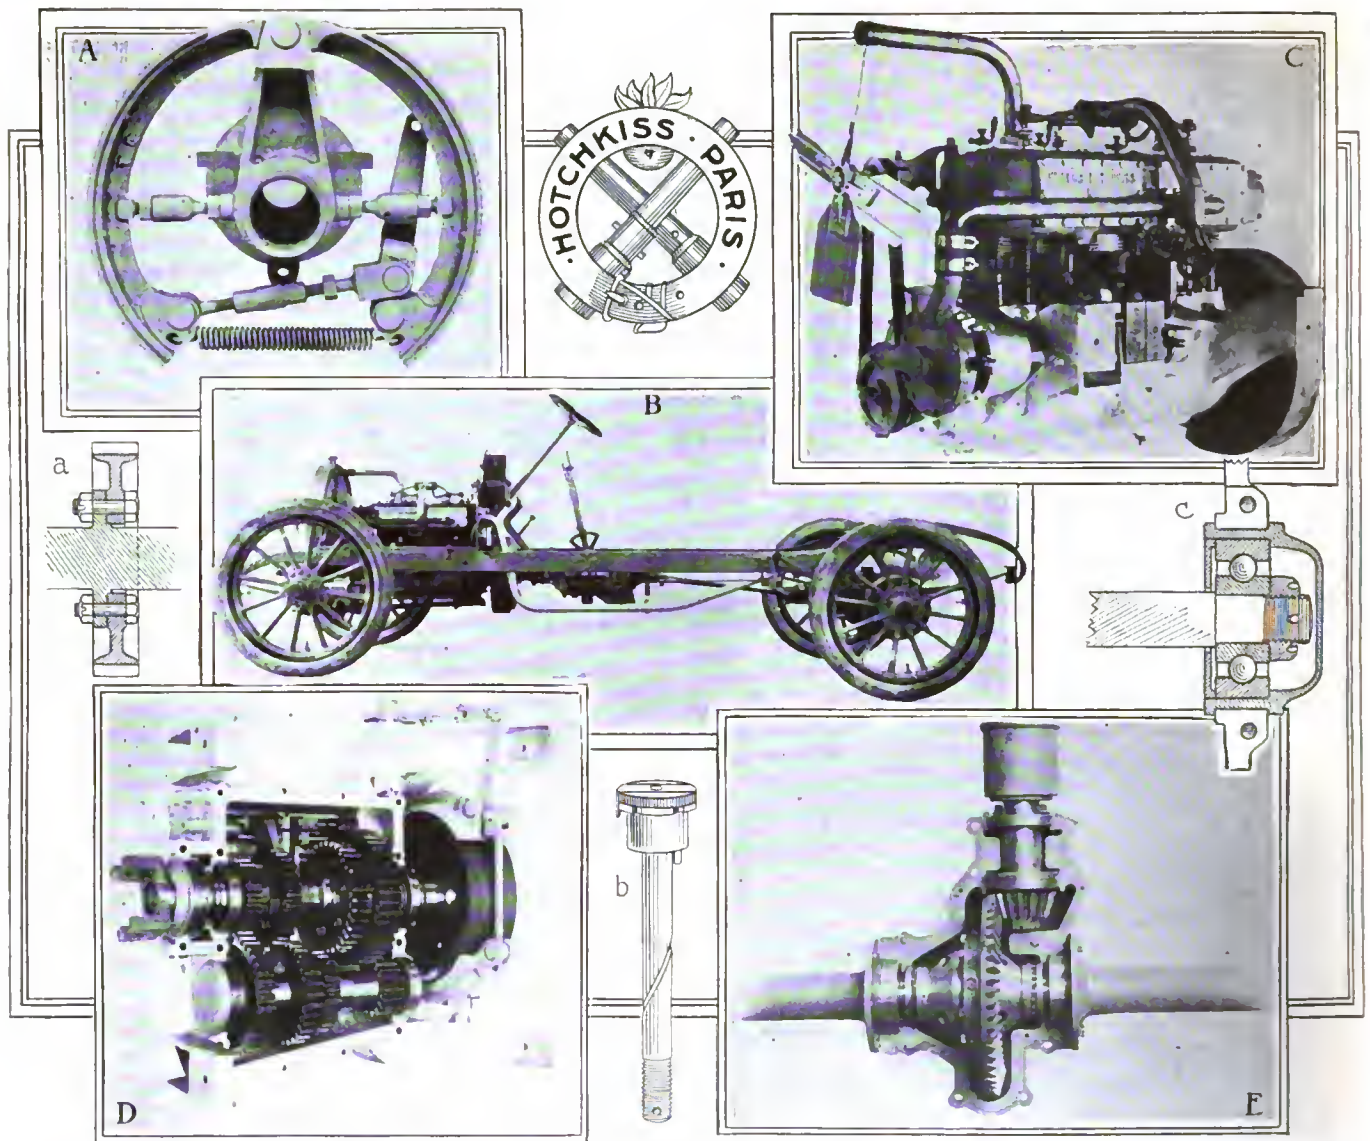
Model T Hotchkiss showing the chassis side view motor, transmission gear, bevel drive, brake mechanism, and other details
